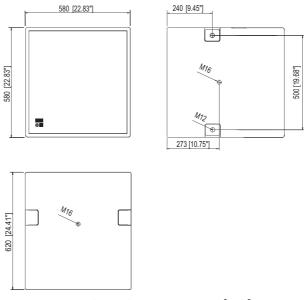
Ci7-TOP cabinet dimensions in mm [inch]
